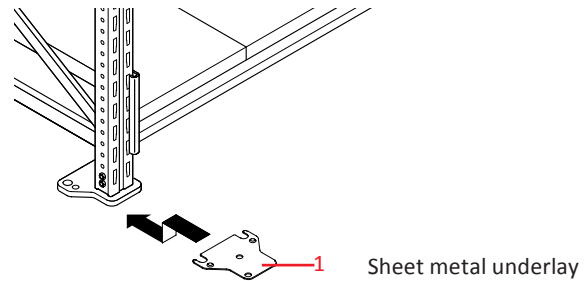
Levelling out floor unevenness using a sheet metal underlay
